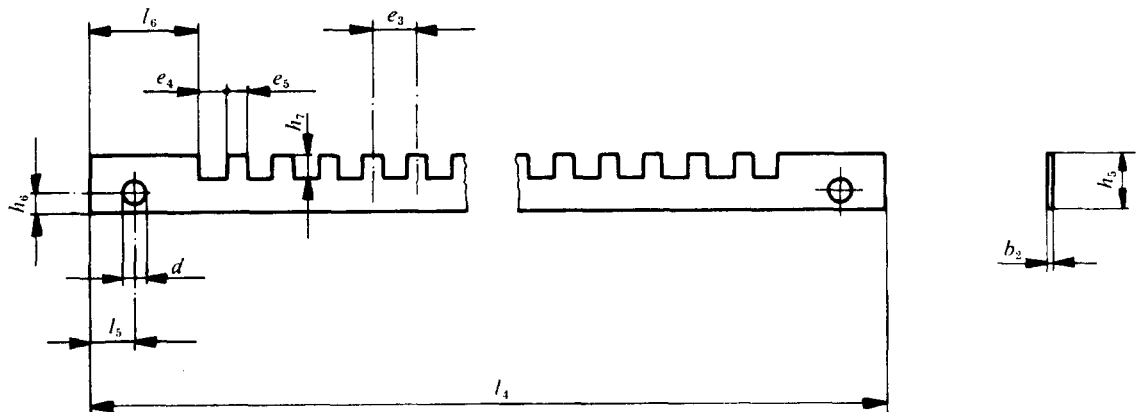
Inner serrated movable bar FIG. 2 — Tringle crénelée intérieure mobile
